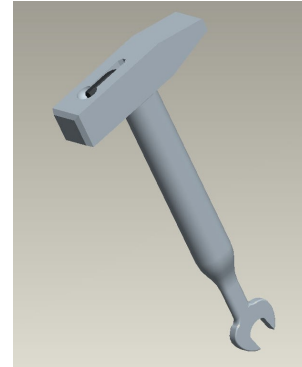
Tool allowing complete assembly and disassembly of the vegetation cutting module.
